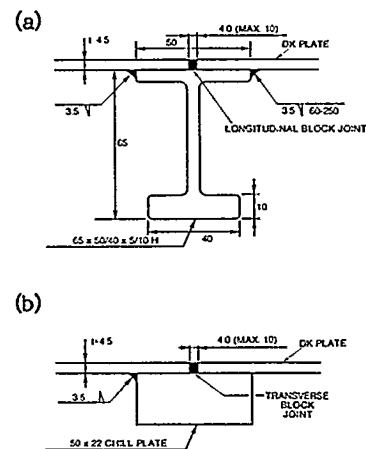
BLOCK JOINTING METHOD (IN MM)
